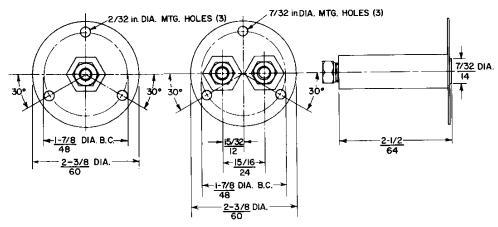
T-800-1603 (Single Hub) & T-800-1604 (Double Hub) Duct Flange)
